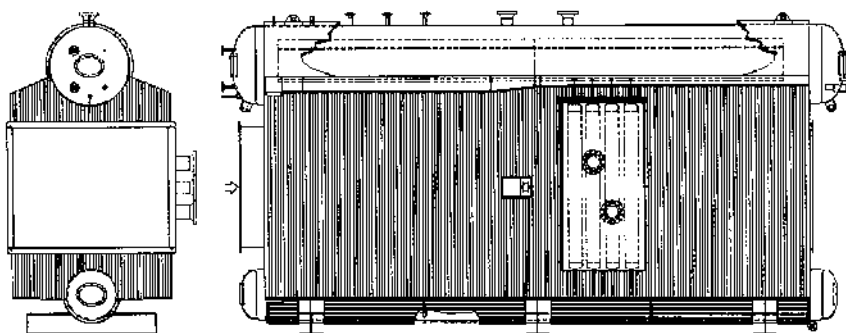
A gas-fired O-type package boiler with extended surfaces. (Courtesy of ABCO Industries, Abilene, TX.)
